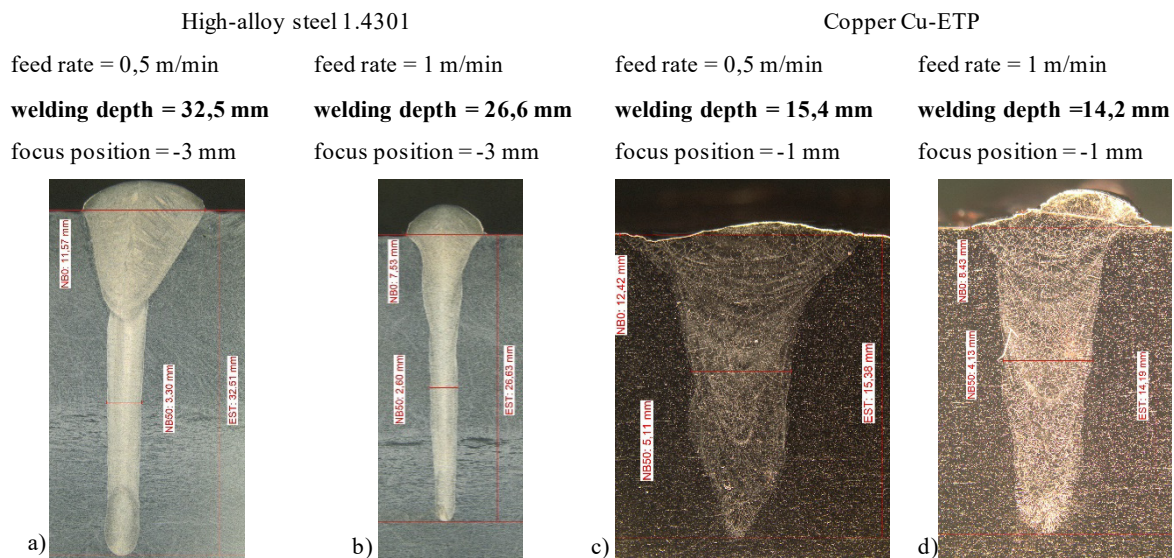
Bead-on-plate welding results using a high-alloy steel plate (1.4301) of 40 mm thickness (a and b) and a copper (Cu-ETP) plate of 20 mm thickness (c and d), 24 kW laser power and BrightLine Weld laser power ratio 75% core – 25% ring.
